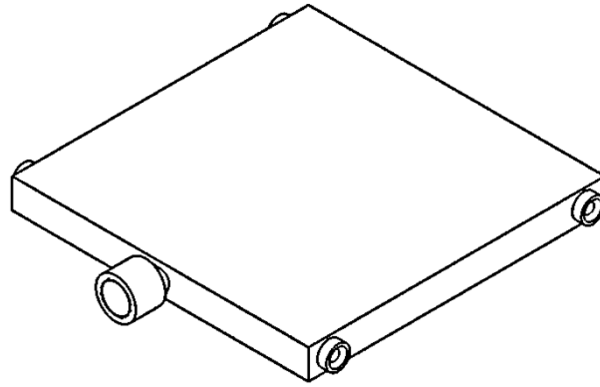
Isometric, external view of the manufactured vapor chamber.
